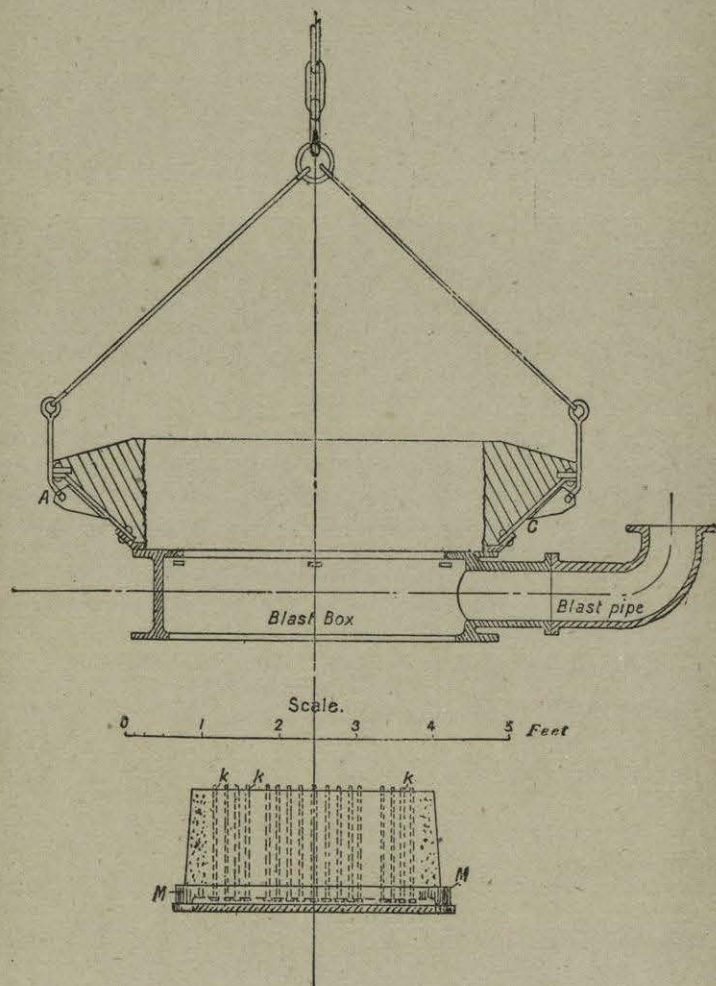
Sketch showing method of inserting rammed baked twyer plug in bottom section of the converter.
